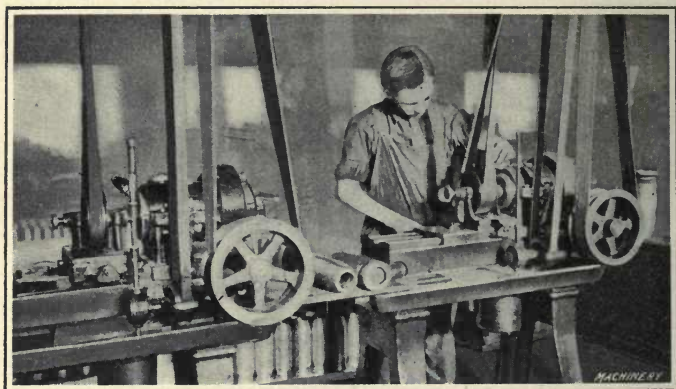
Threading Nose and Base Ends of Shell in Holden-Morgan Special Thread Milling Machines
